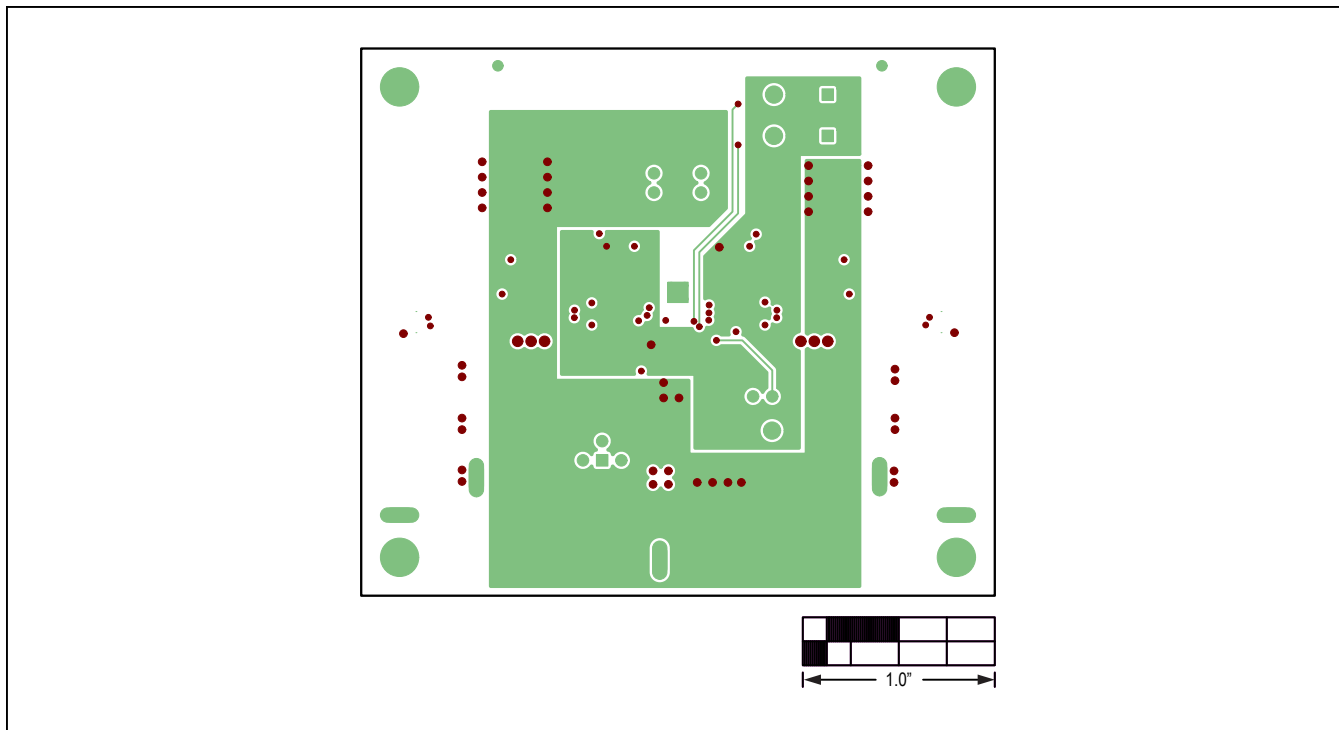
MAX16932 EV Kit PCB Layout—Layer 2
